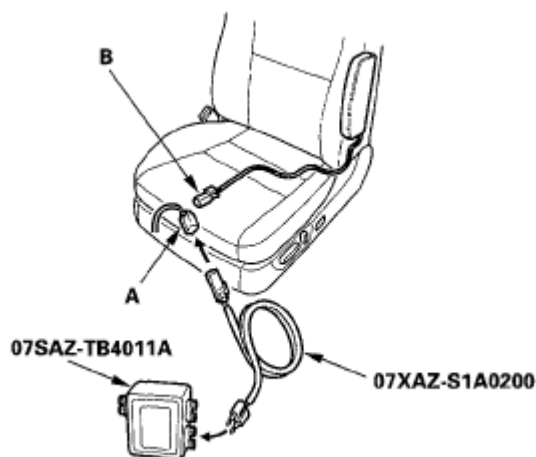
Identifying Left Side Wire Harness 2P Connector And Driver's Side Airbag
